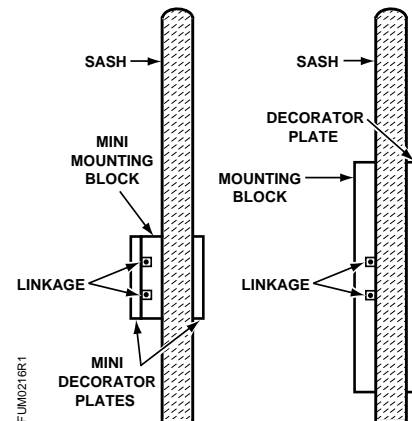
Mounting Block and Decorator Plate Installation for Regular and Mini Mounting Blocks.
